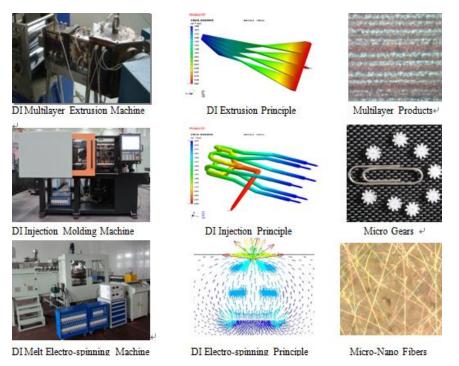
Equipments, principle, and product of melt DI injection molding, DI nano-composites extrusion molding and melt differential electrospinning.
